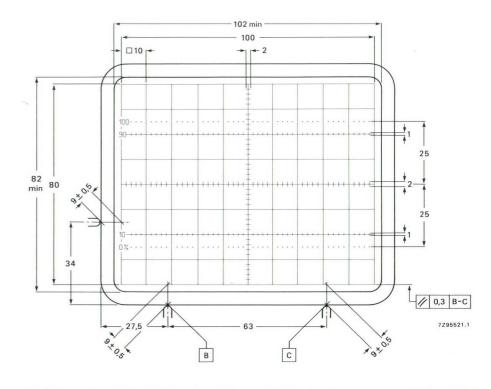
Front view of tube with internal graticule, type 123 (final accelerator contact at left-hand side). The faceplate reference points are used for aligning the graticule with the faceplate.
